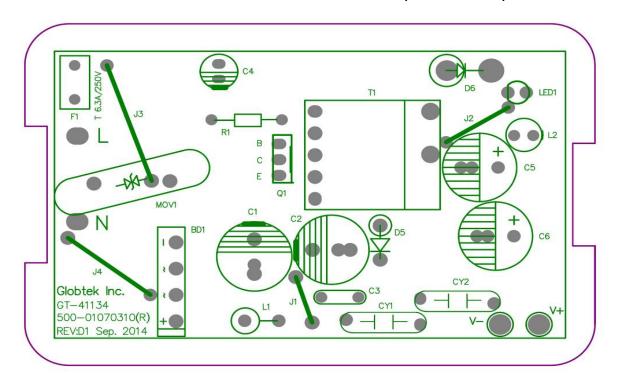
PCB LAYOUT FOR OPEN FRAME MODEL(Second structure)
